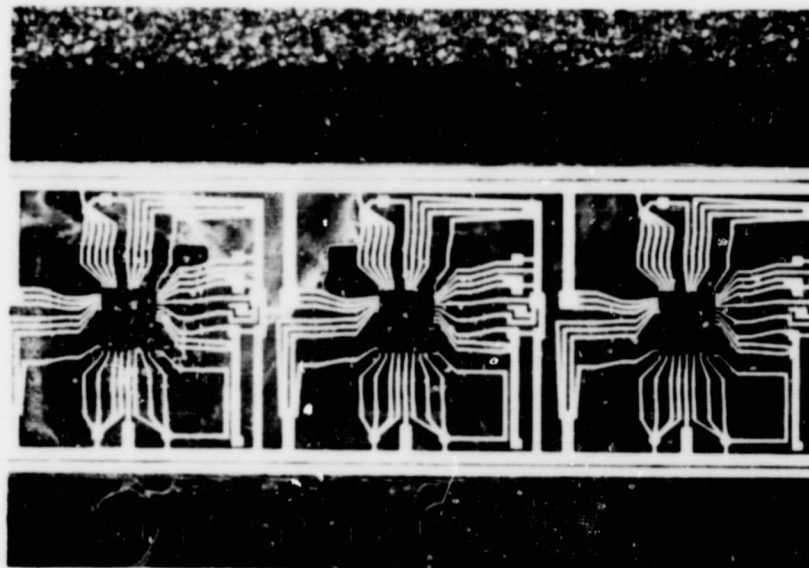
Tape carrier patterned for Type 342 LSI devices.
